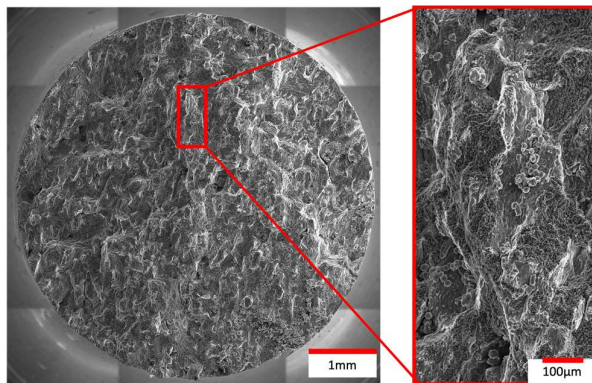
Composite SEM of Build D tensile specimen fracture surface after 20% forging reduction.
